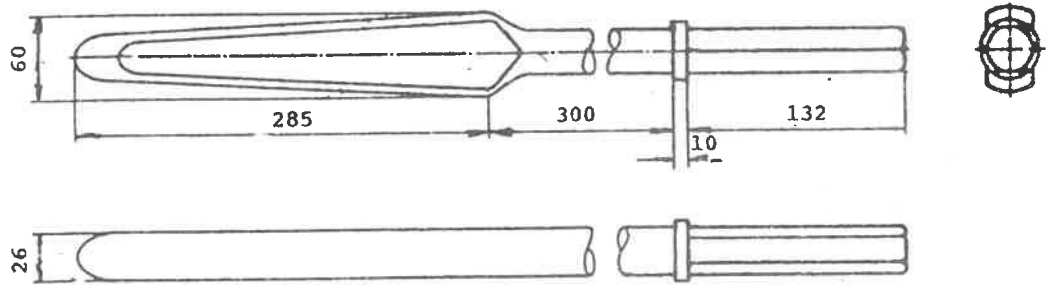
BULL WEDGE FOR 40 mm DIAMETER HOLE
